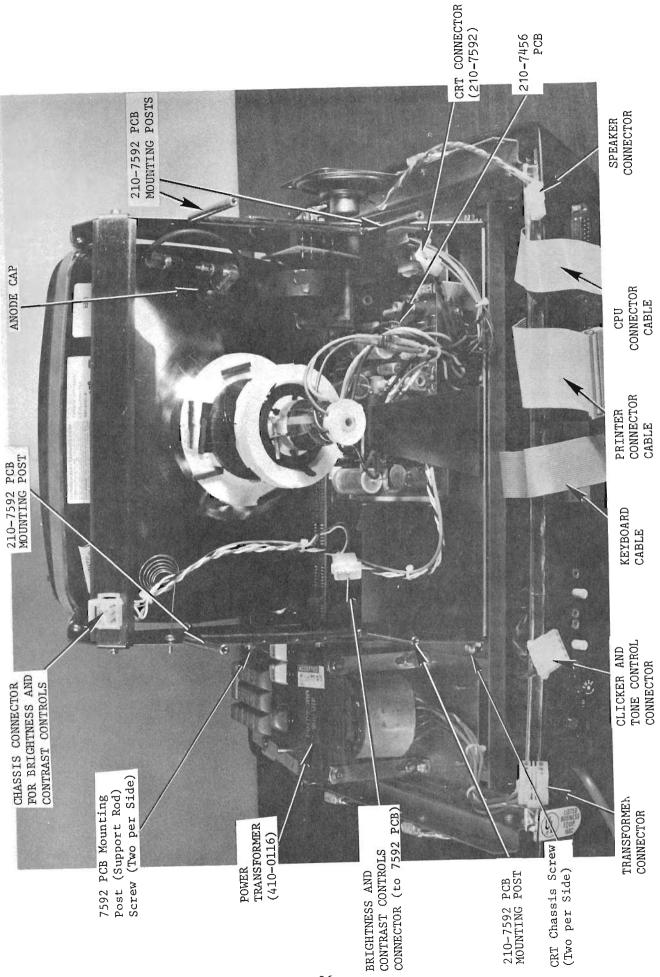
Rearview of Chassis with 7592 PCB Removed
